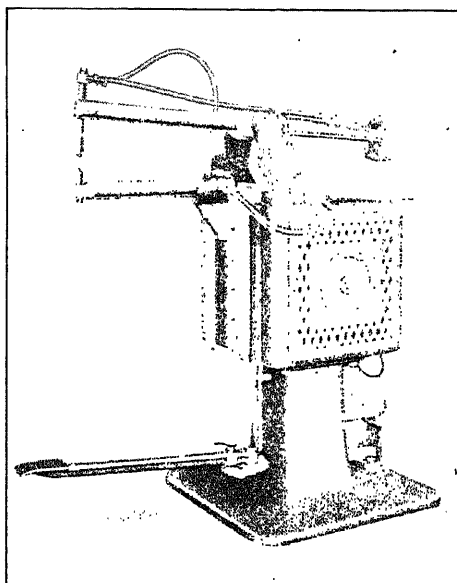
Winfield Sliding Horn Spot-Welding Machine.
